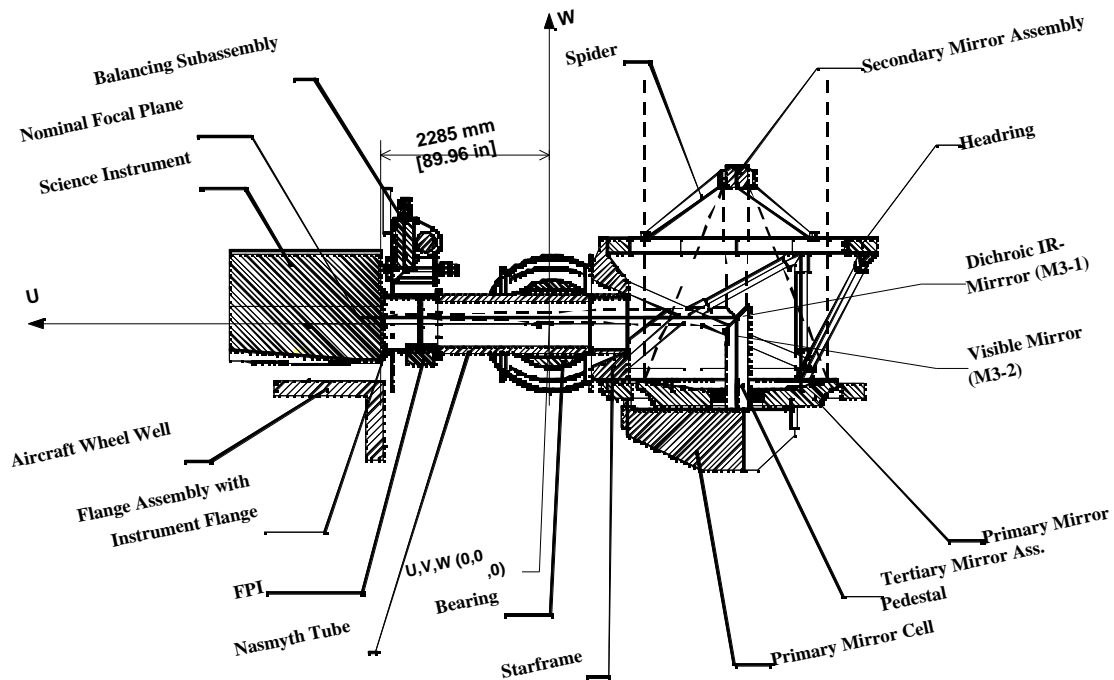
Mechanical TA System Configuration with Mounted SI
